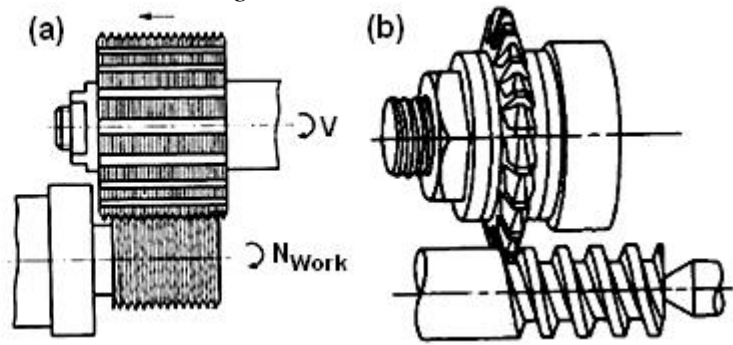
(a) Short thread milling (b) Long thread milling
